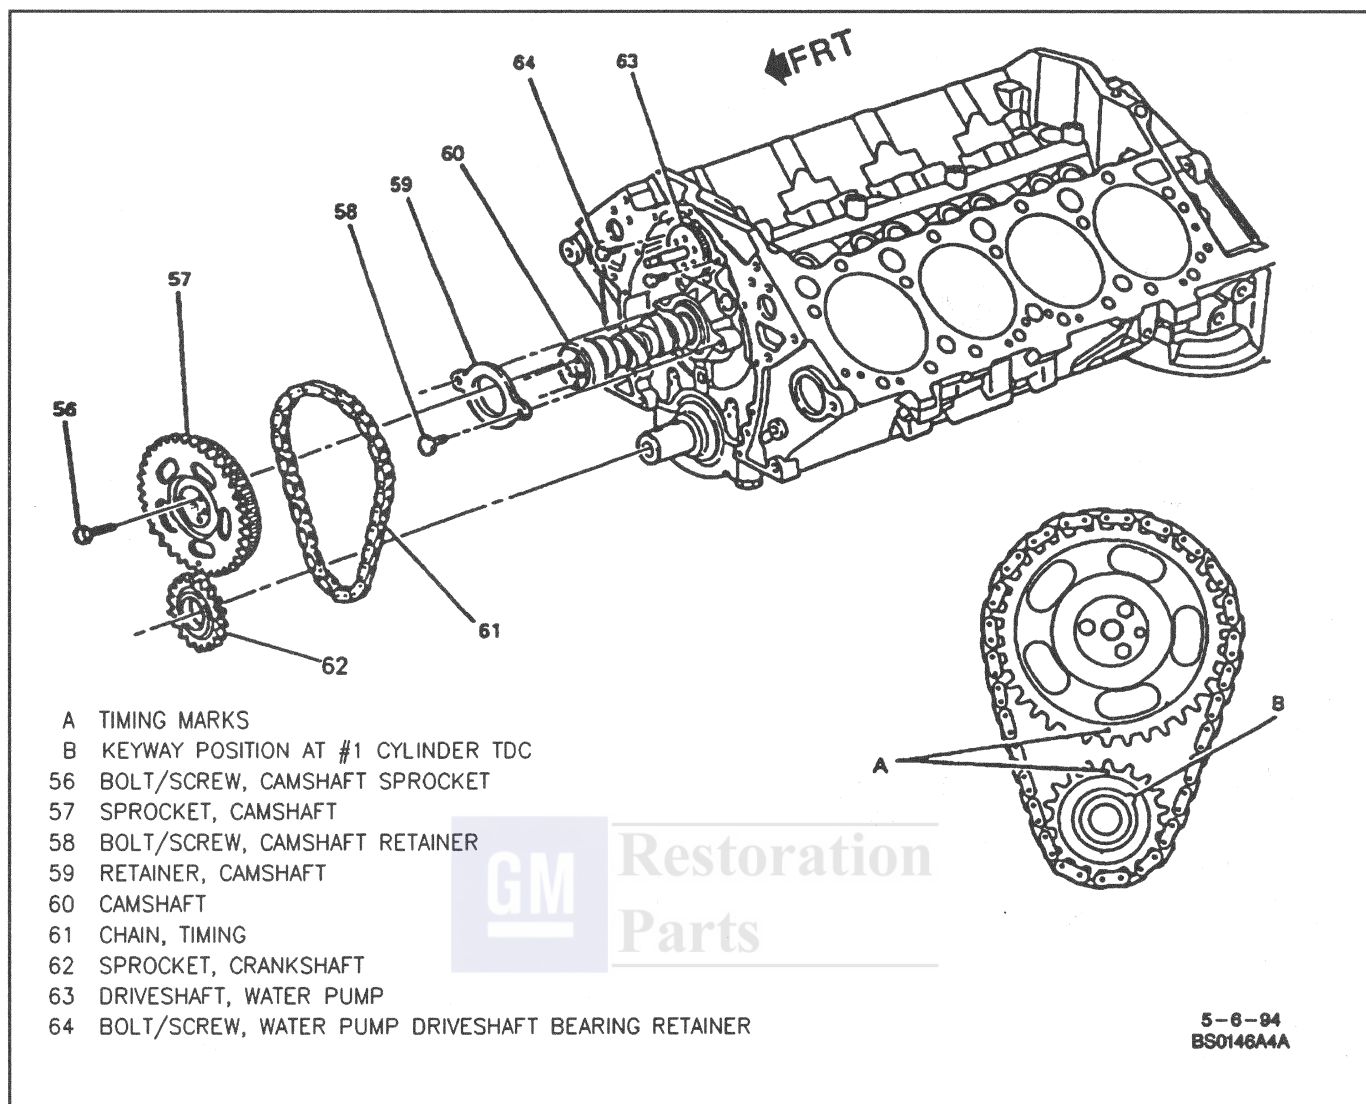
Camshaft, Sprockets and Water Pump Driveshaft
